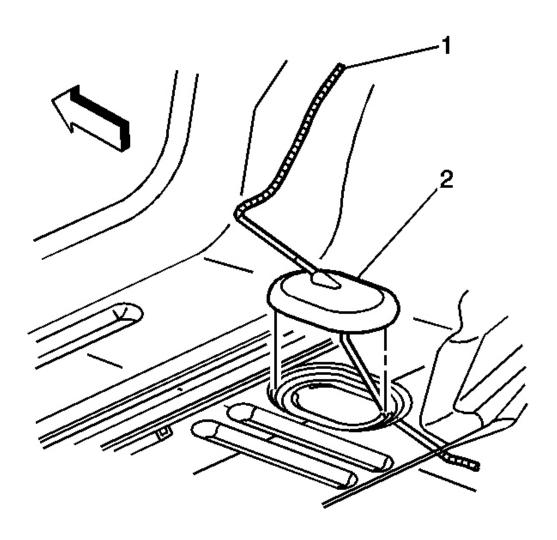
View Of Cable Grommet At Floor Panel Courtesy of GENERAL MOTORS CORP.
